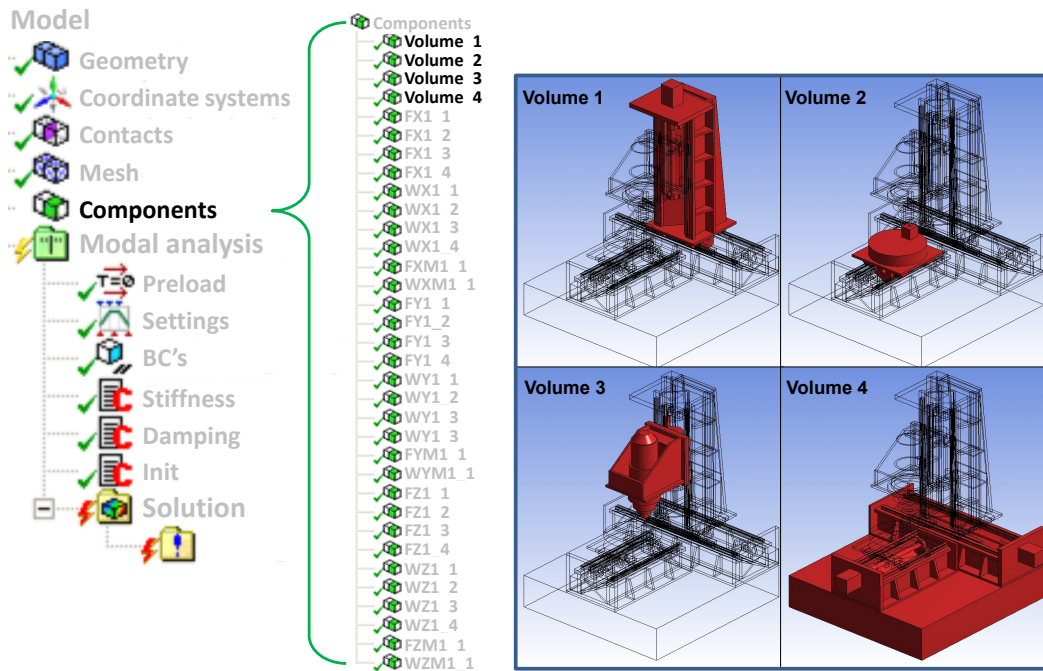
Axis components (sub-assemblies) of a three-axis machine tool.
